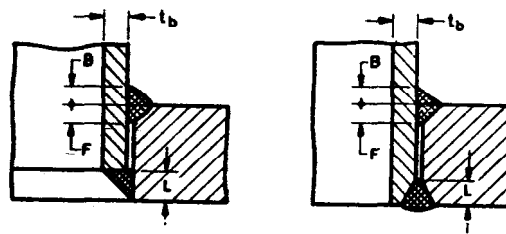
WELDED SOCKETS (SCREWED)
